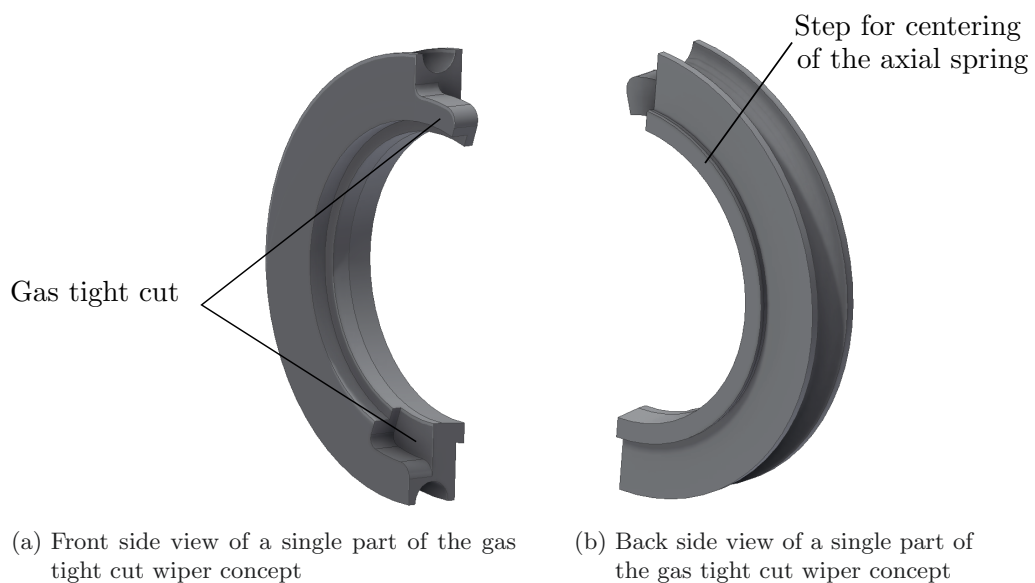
Front and back side view of a single part of the gas tight cut wiper concept
